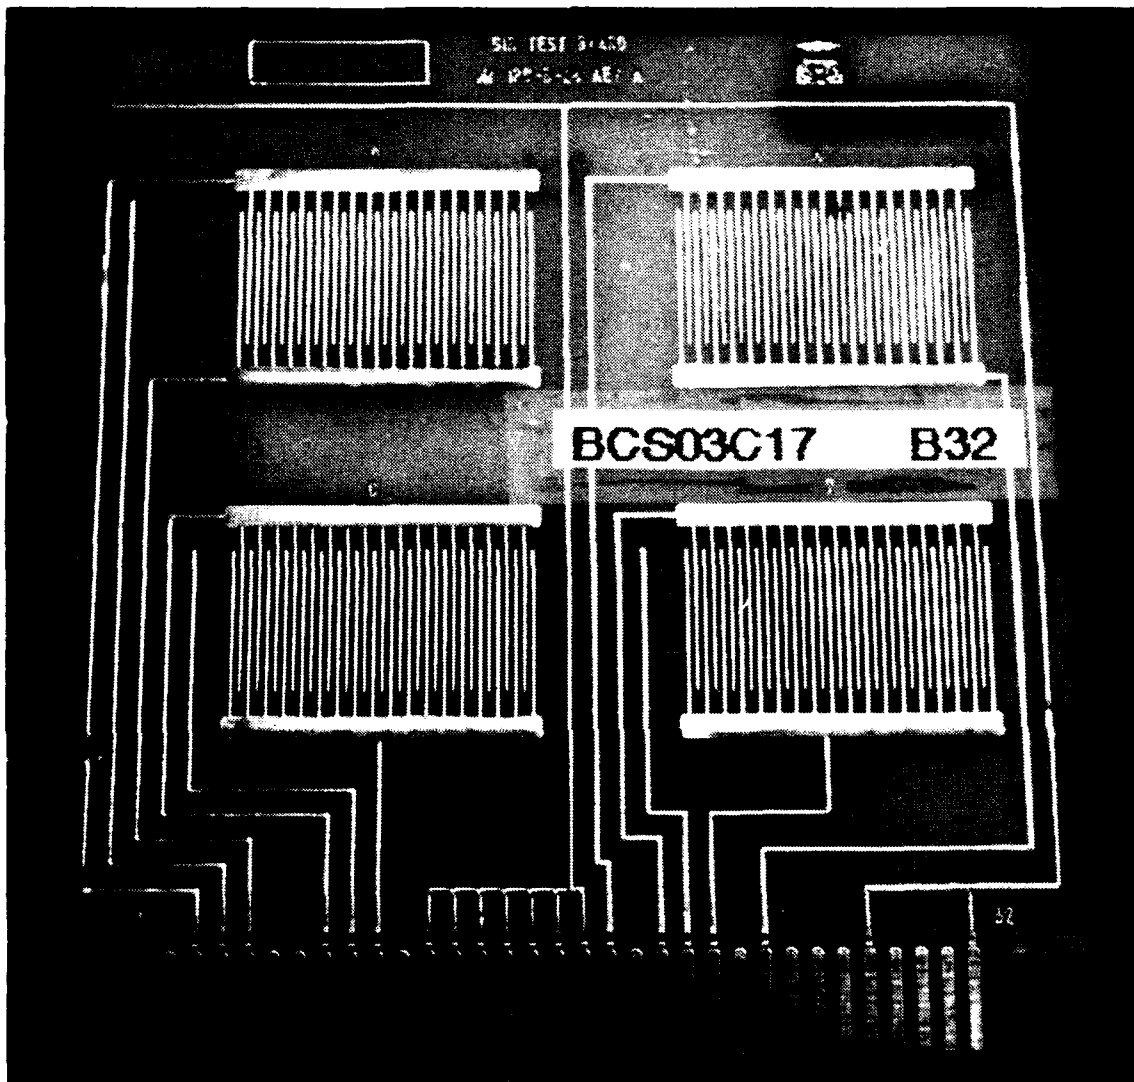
IPC B-24 PWB Used For Surface Insulation Resistance Testing
